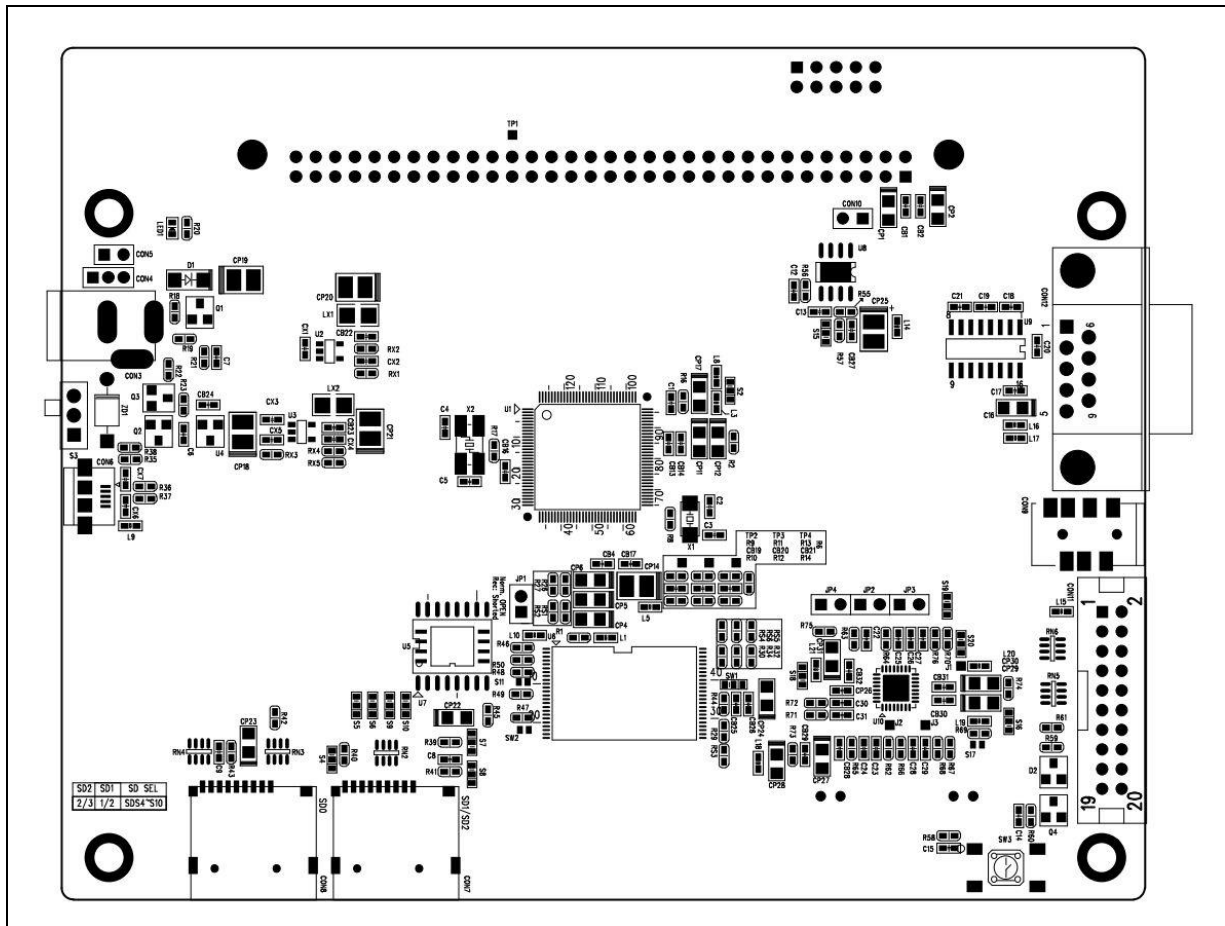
NuMaker-emWin-N9H20 PCB Placement (Back)
